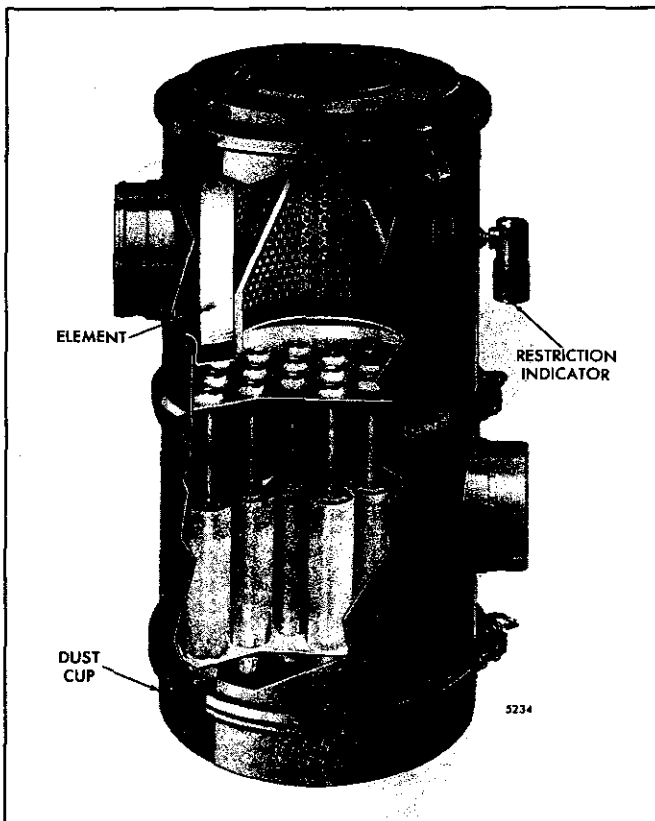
Dry Type Air Cleaner (Extra Heavy Duty)
